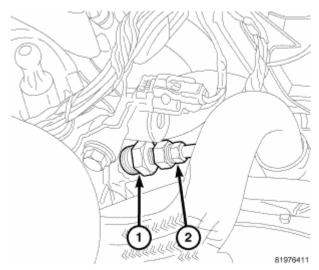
OIL PRESSURE ADAPTER 9879 Courtesy of CHRYSLER LLC
